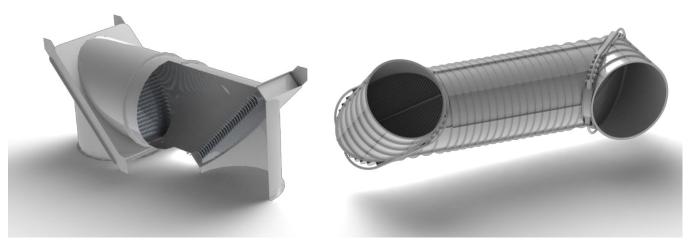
Custom turning section assembly examples. Left - Circle-shaped fiberglass duct. Right – non-planar turning.
